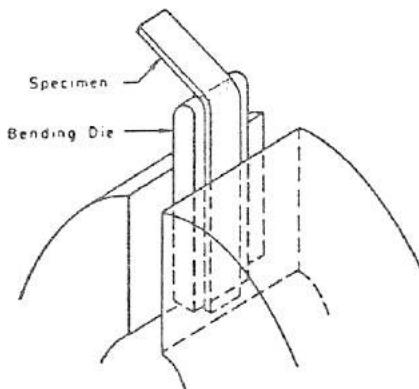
Schematic fixture for semi-guided bend test of thin specimens - one end held.
